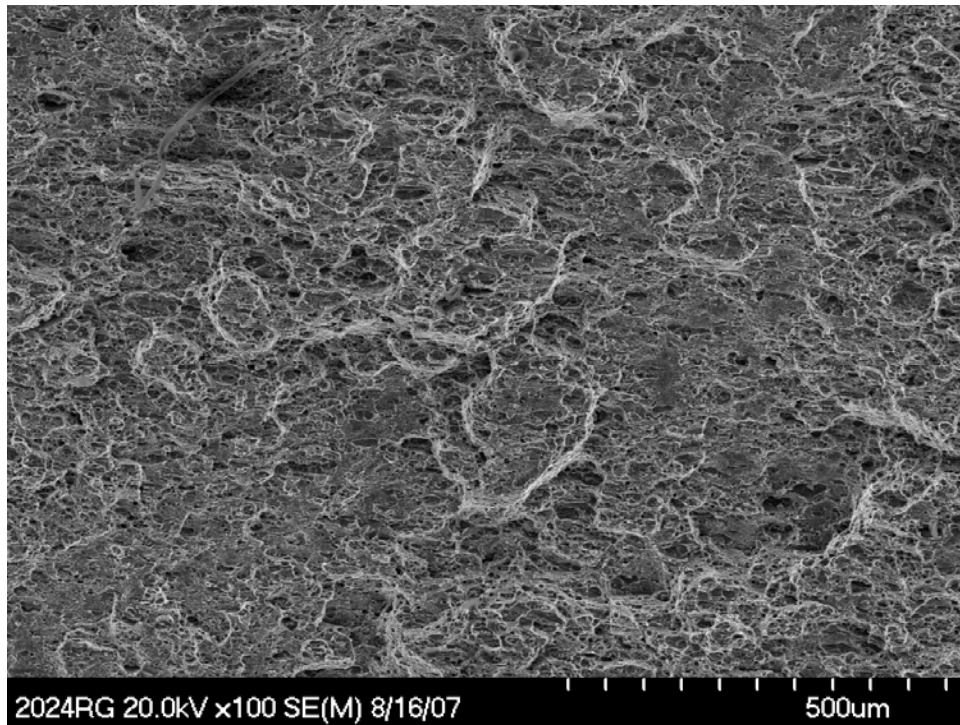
Image showing the defects formed in bad weld of design of experiments in AA2024- T3 at 5X magnification.
